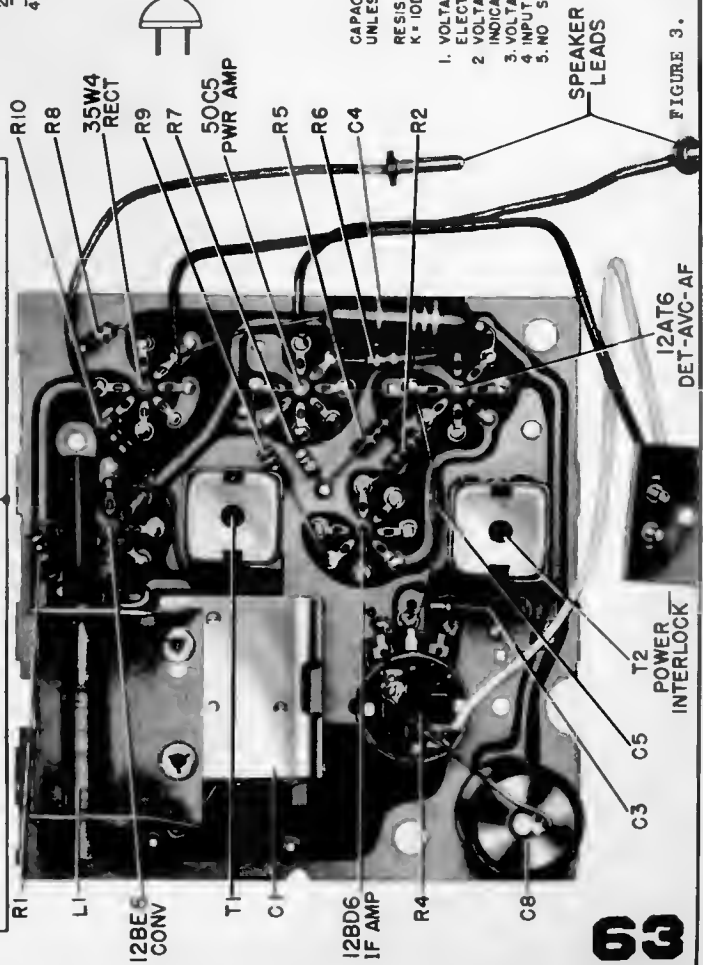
FRONT VIEW OF CHASSIS - WIRED
